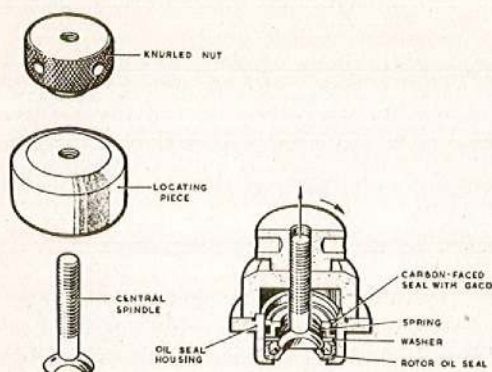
Dismantling the oil seal housing, using tool T.182198
